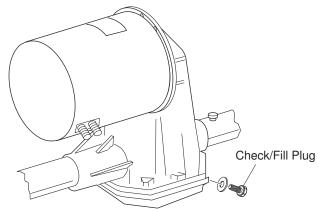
Add, Check and Drain Rear Axle Lubricant
